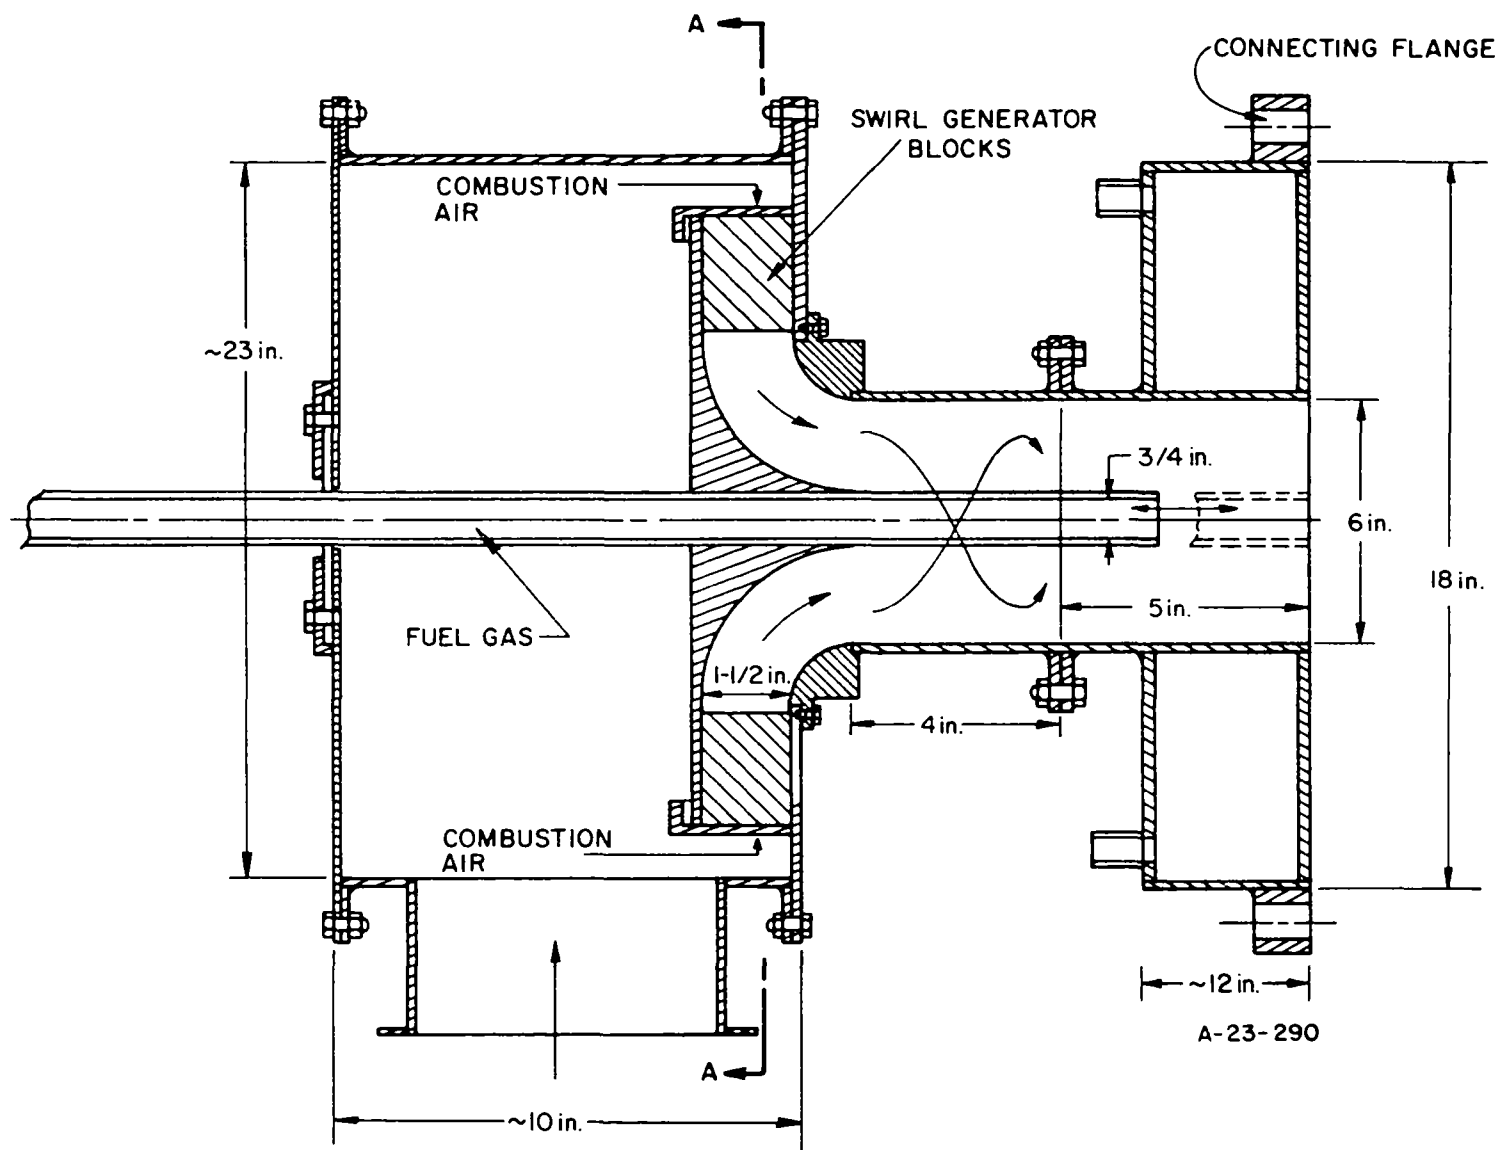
CROSS SECTION OF HOT-MODEL BURNER
